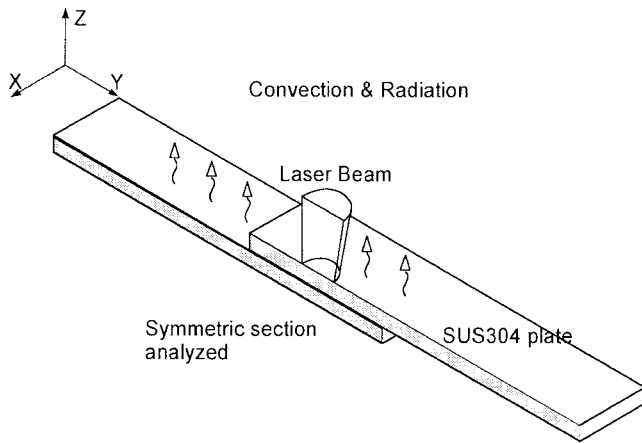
Symmetric physical model for thermal analysis of laser spot welding.
